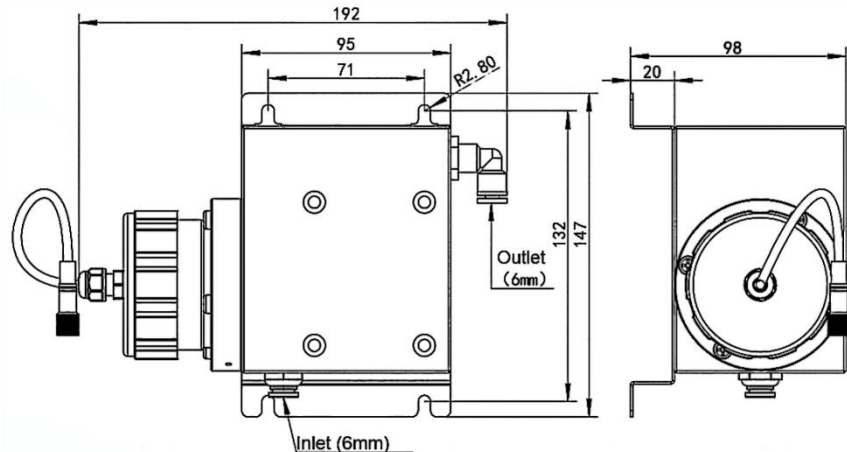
Dimensions of low range sensor with back plate (unit: mm)
